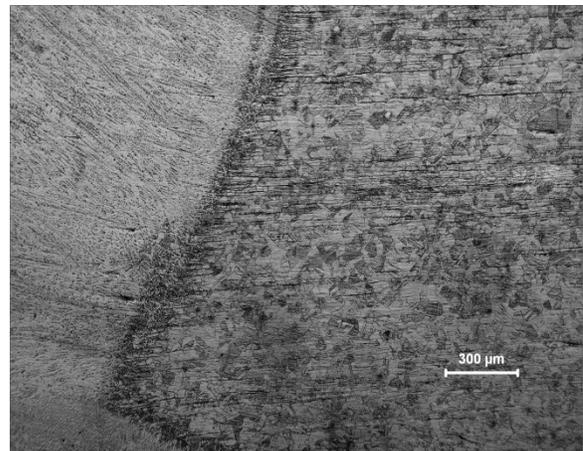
Weld metal zone and HAZ microstructure - SMAW welded joint.
